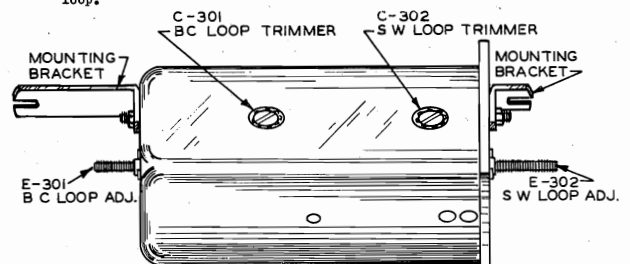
COUPLER SHOWING TRIMMER LOCATION
